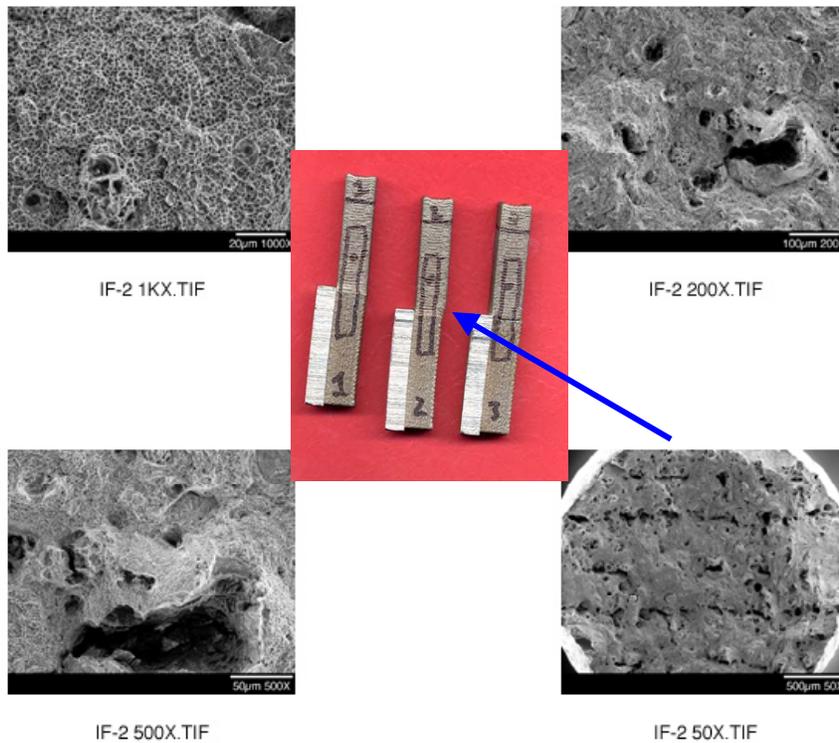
Fracture Surface of Type L LENS on LENS Block/Tower Showing Defects Due to Lack of Interlayer Fusing
